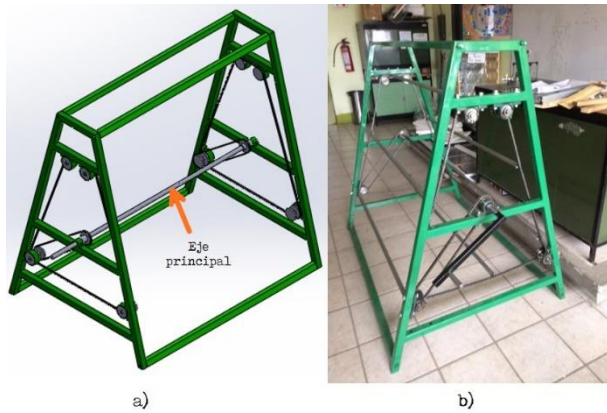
Prototype 5 Integration of the experiences. a) In CAD indicating the main axis to generate the movement. b) Constructed
